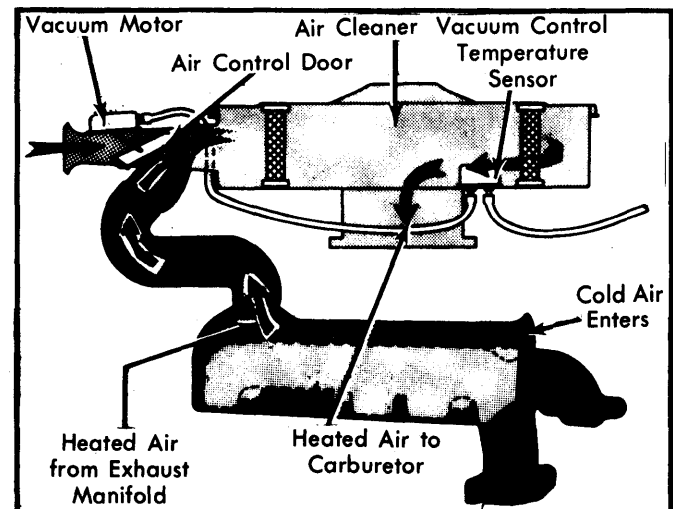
Thermostatic Air Cleaner Assembly Showing Air Flow into Carburetor
